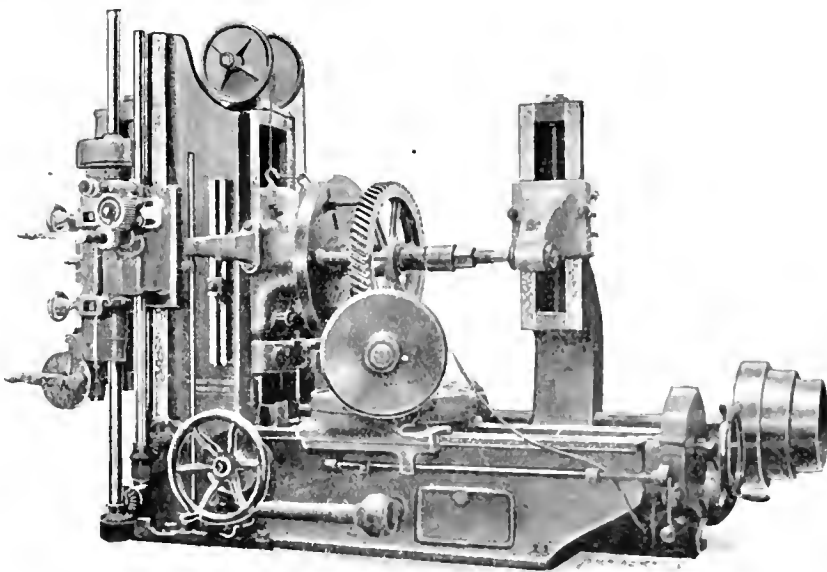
Ducommun Gear-hobbing Machine cutting a Spiral Gear.
